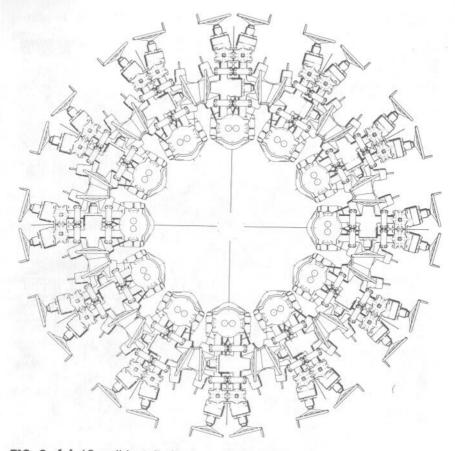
A 12-well installation in a single 120-in. diameter platform leg was made possible by using the Grayloc clamp connector. *(Courtesy Gray Tool Co.)
